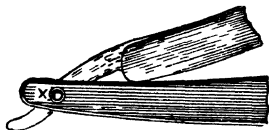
Razor with Side Fall, showing where Rivet should be Tapped.
